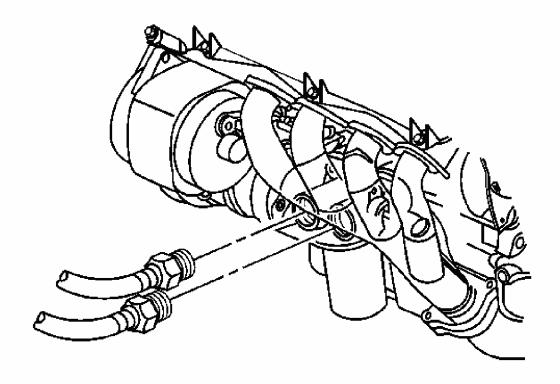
View of Engine Oil Cooler Quick Connect Fittings Courtesy of GENERAL MOTORS CORP.
